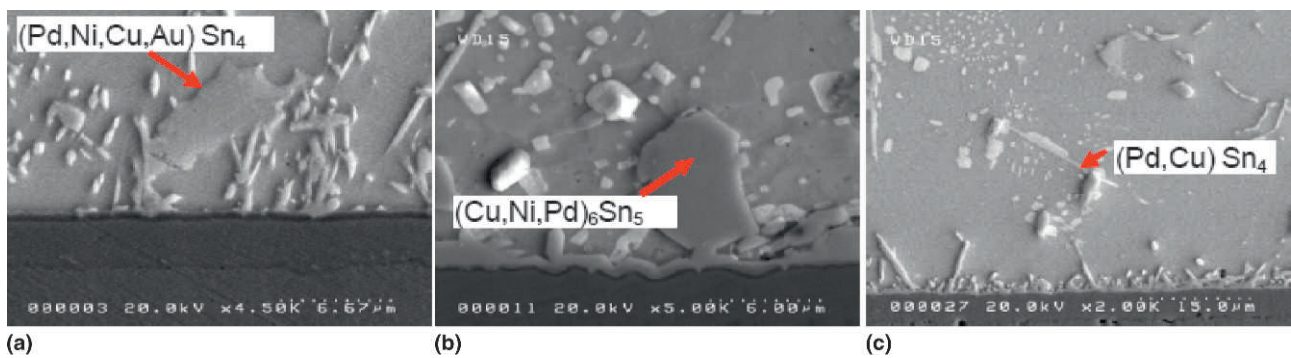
Pd-containing intermetallics in solder joint, ENEPIG. (a) BGA352, Paul; (b) QFP240, Orchid; (c) BGA352, Violet.
